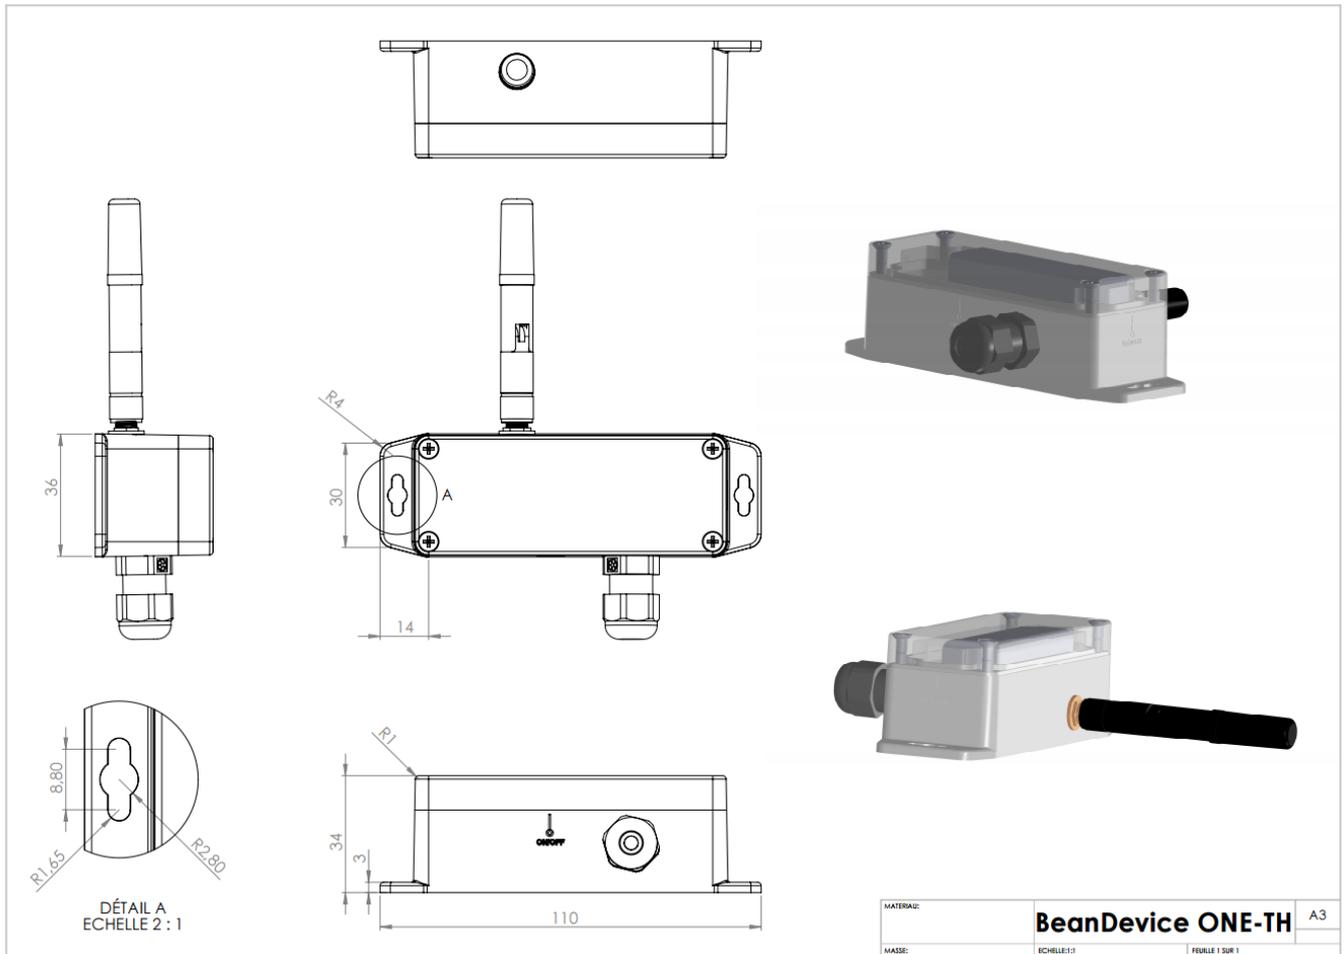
Beandevicé® ONE-TH/ONE-TIR/ONE-BN Mechanical drawing
